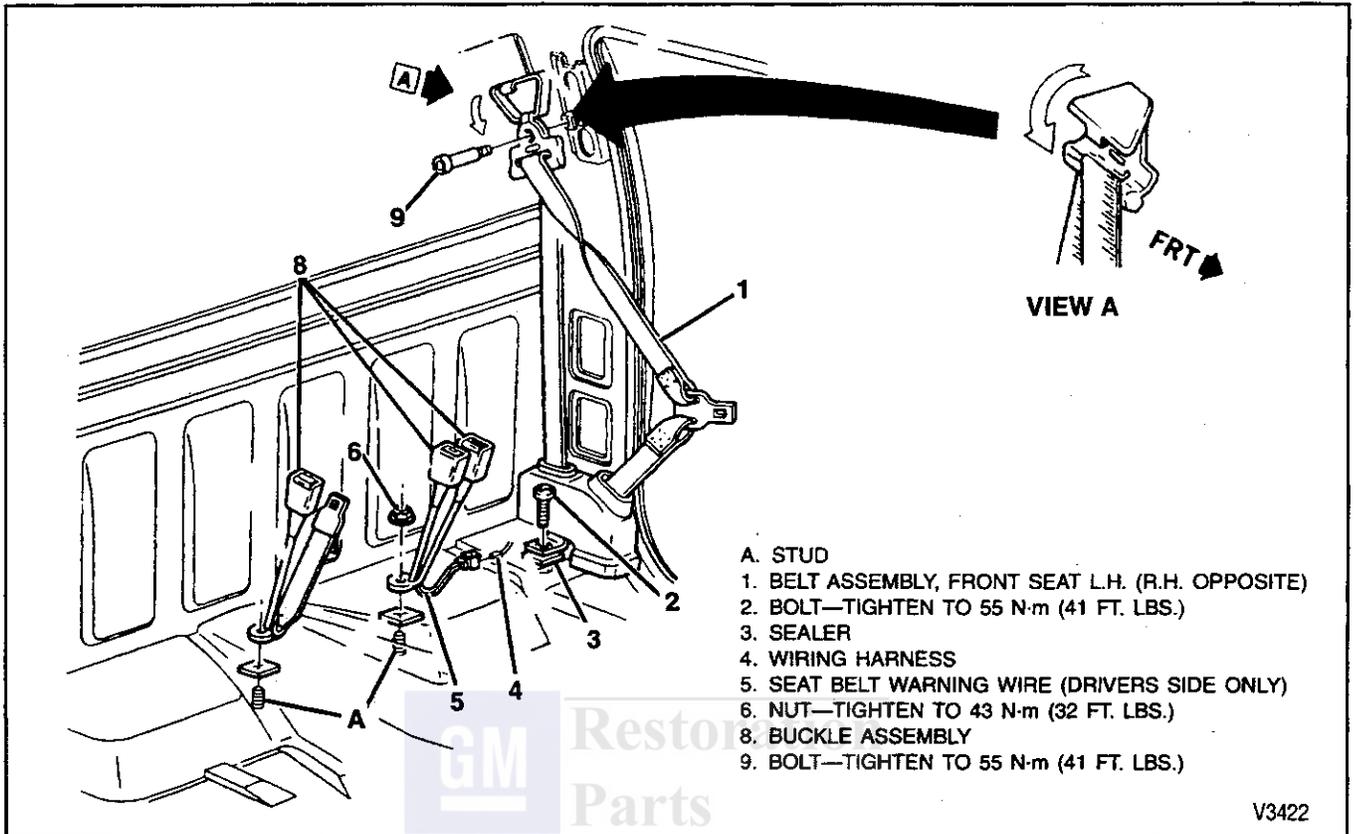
Front Seat Belts (Regular Cab with Bench Seats)
